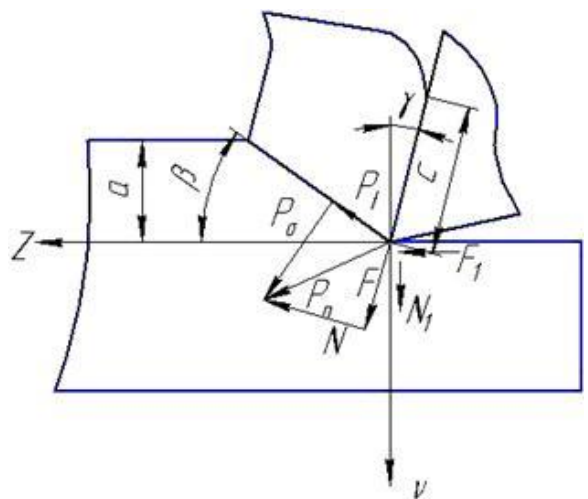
Schematic of forces on the front and rear surfaces of the tool
